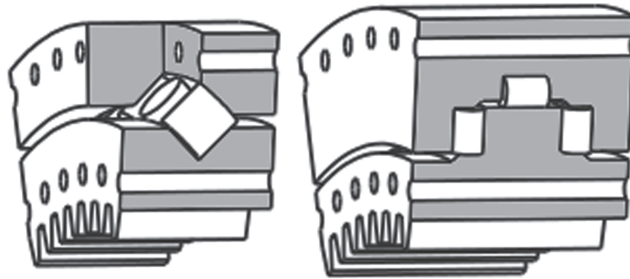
Cylindrical roller bearing for the use as wind turbine pitch bearing
